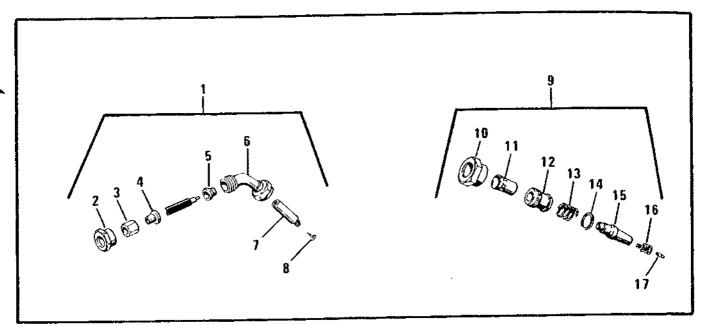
IGNITION CABLE, SPARK PLUG END MODELS 0-470-G-P-R
